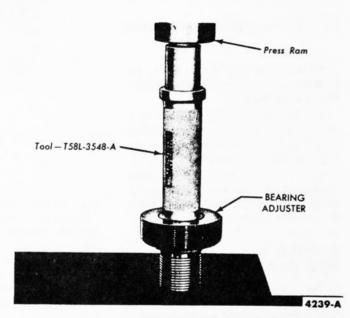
Steering Shaft Upper Bearing Cup Installation
